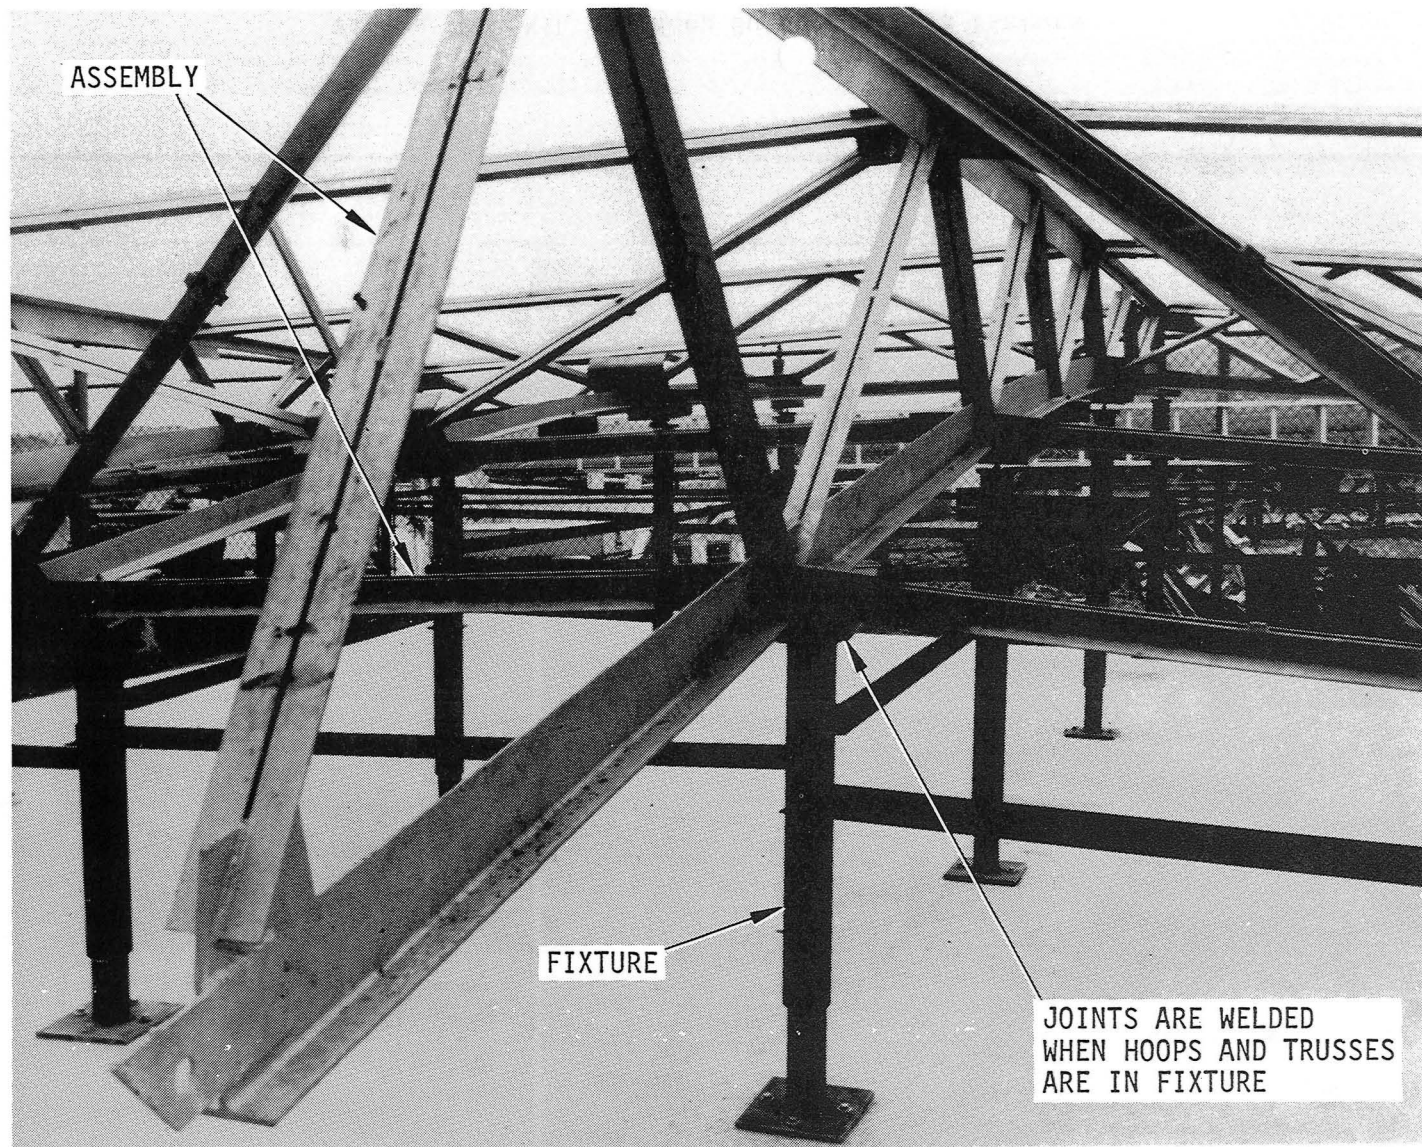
Closeup View of Rib and Hoop Subassembly on Fixture
